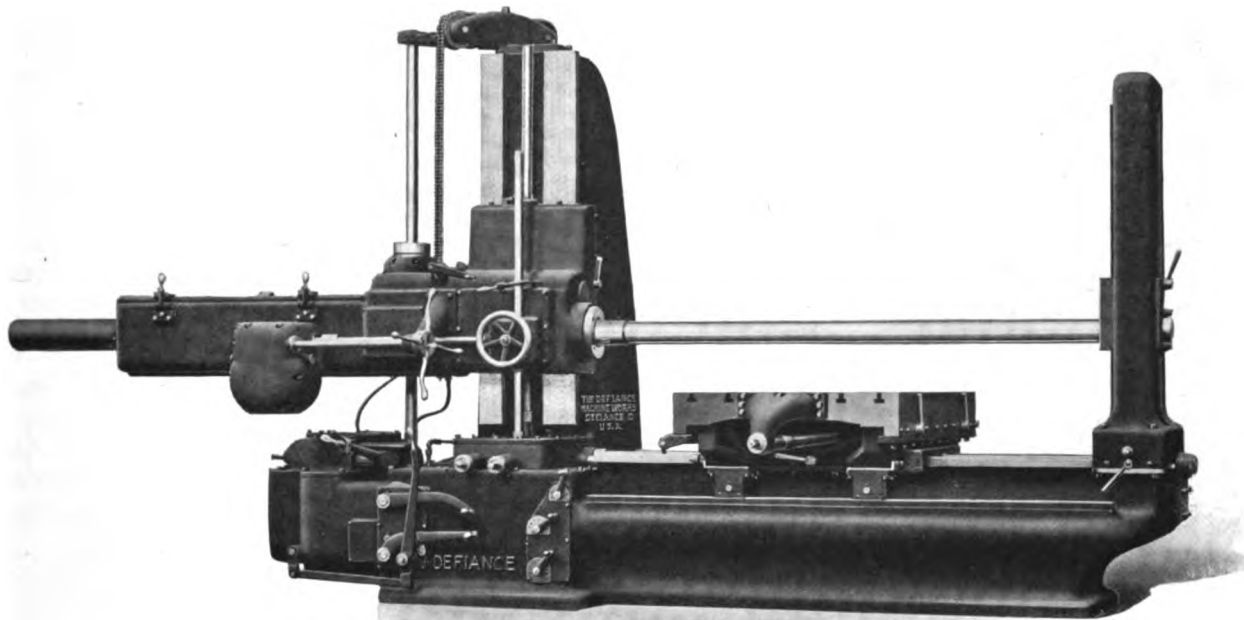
No. 6 Horizontal Boring, Milling, Drilling and Tapping Machine
